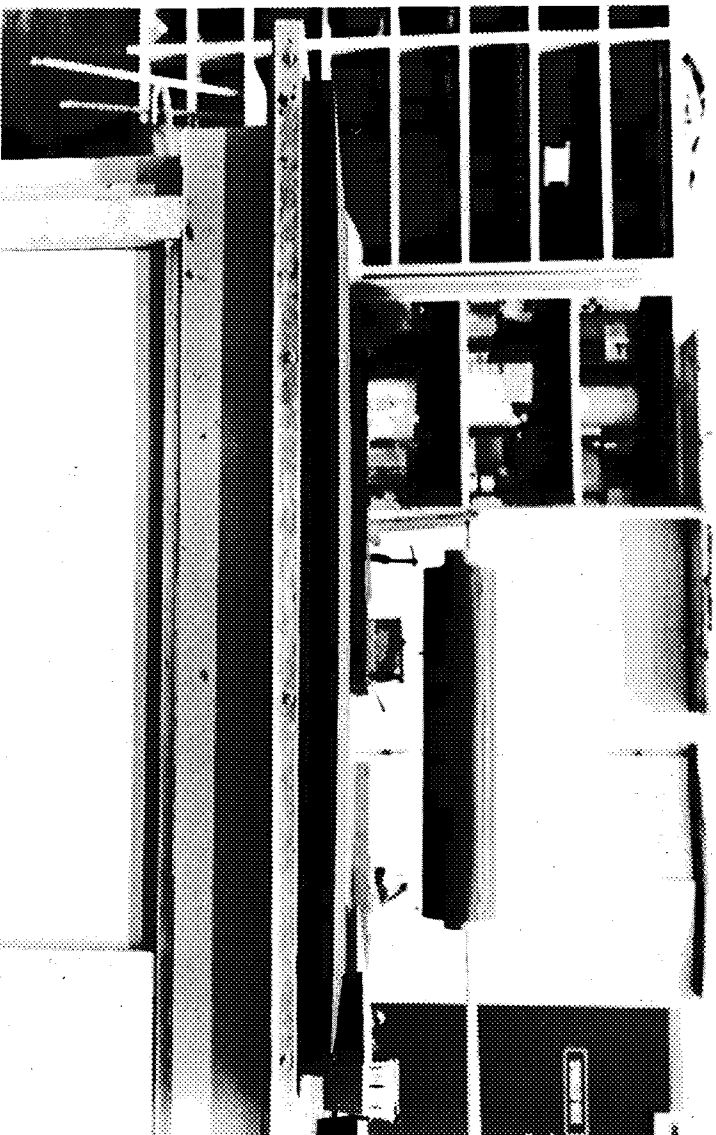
FINISHED ABLATOR ASSEMBLY
